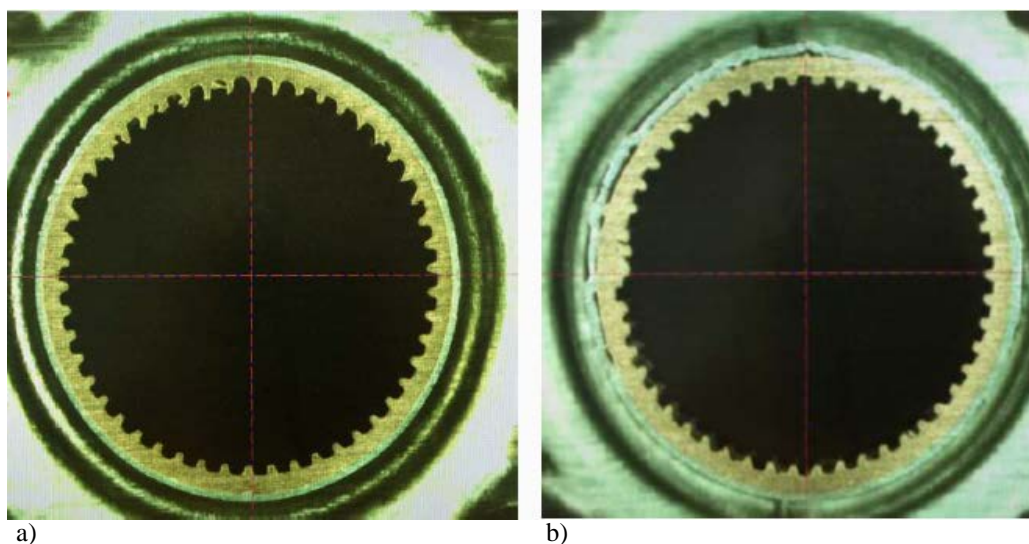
a) Internal tube enhancements for pressure expanded tube; and b) mechanically (bullet) expanded tube
